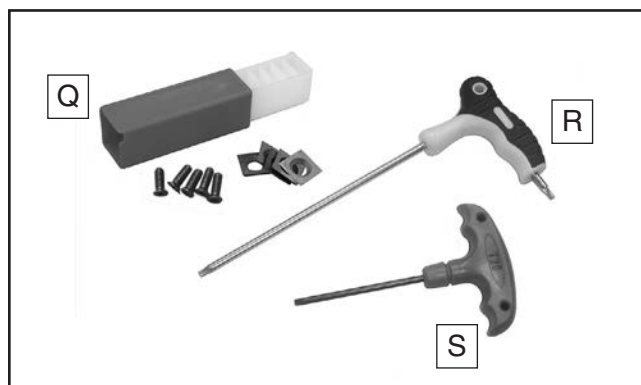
Spare cutterhead inserts and Torx wrenches for spiral cutterhead planers.
